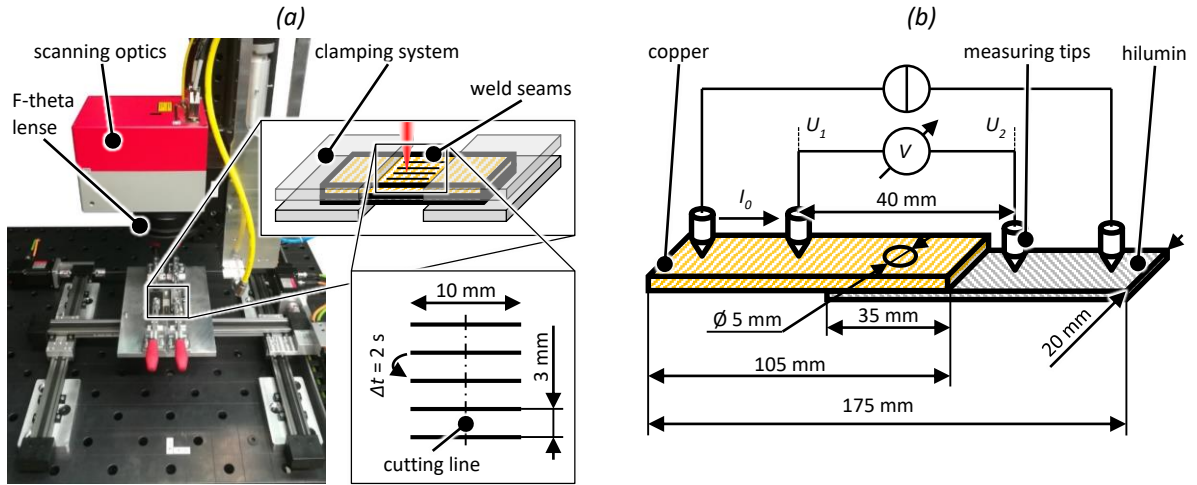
(a) Short pulse laser welding set-up and the linear weld schematic for seam cross-sections and (b) the joint geometry as well as the set-up for electrical resistance measurement
